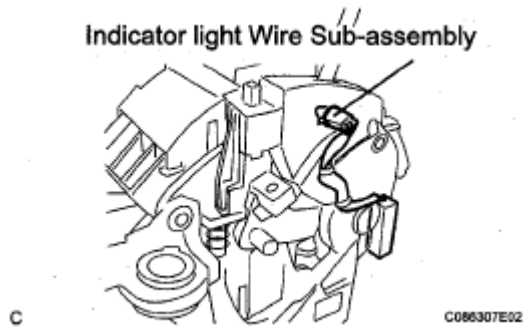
Identifying Indicator Light Wire Sub-Assembly
